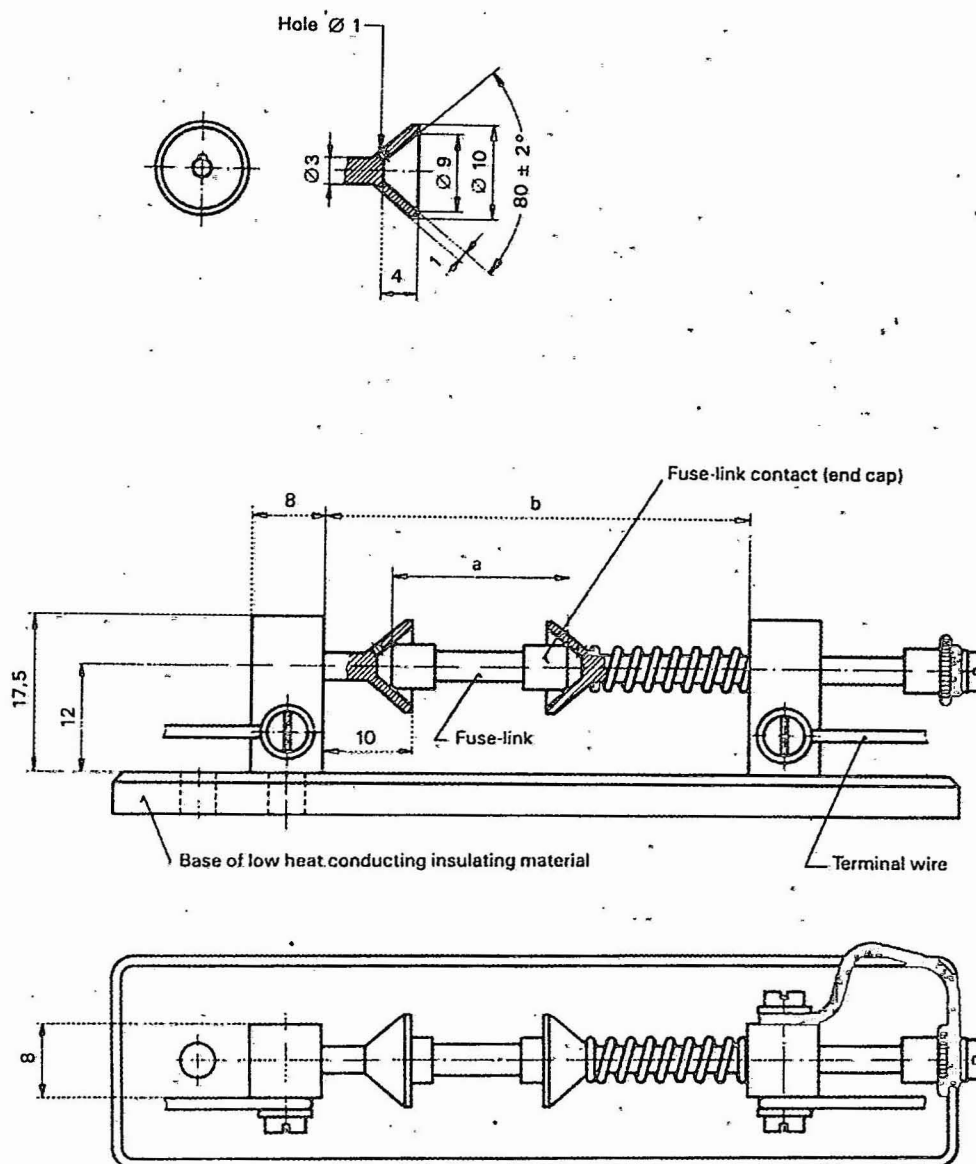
Test fuse-base for 5 mm × 20 mm and 6,3 mm × 32 mm fuse-links –
